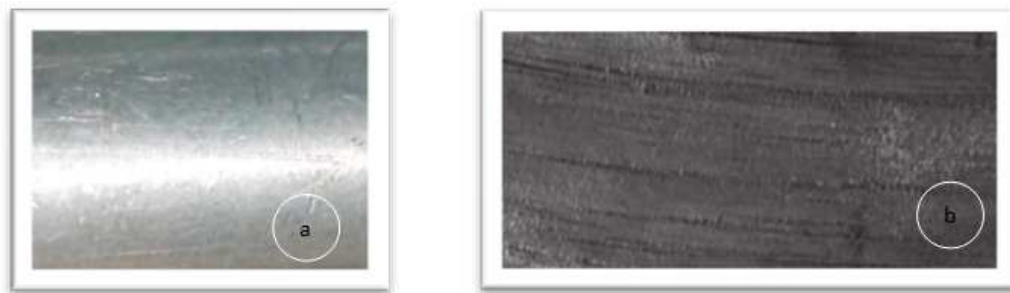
As-received surfaces (a) before and (b) after wear test in hydraulic oil
